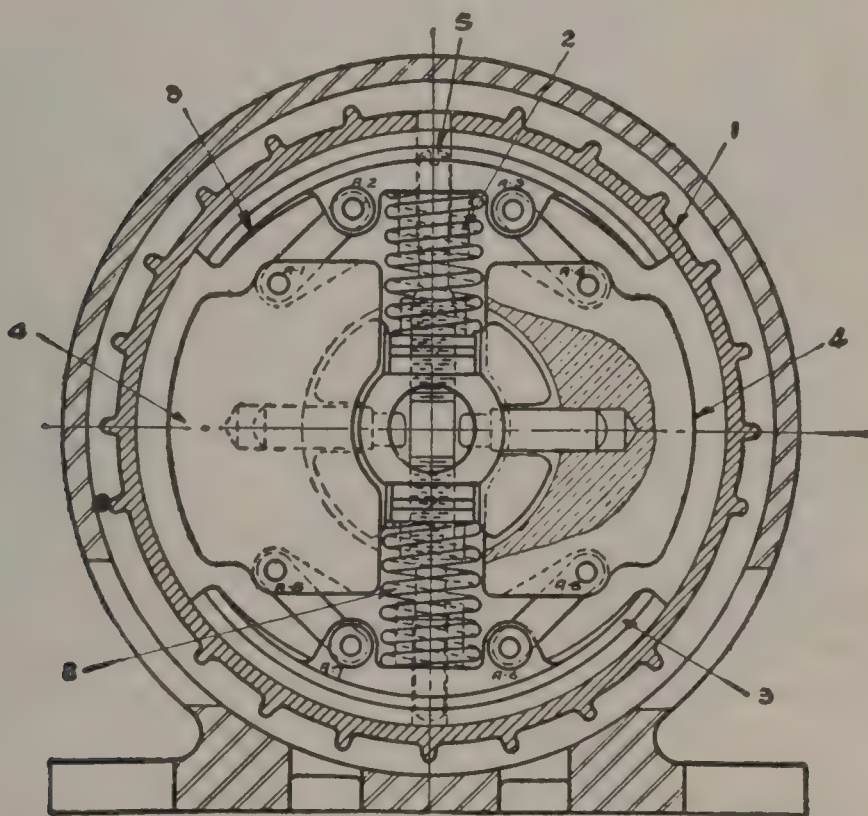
Sectional view of one form of Gray & Davis friction drive, perpendicular to armature shaft
